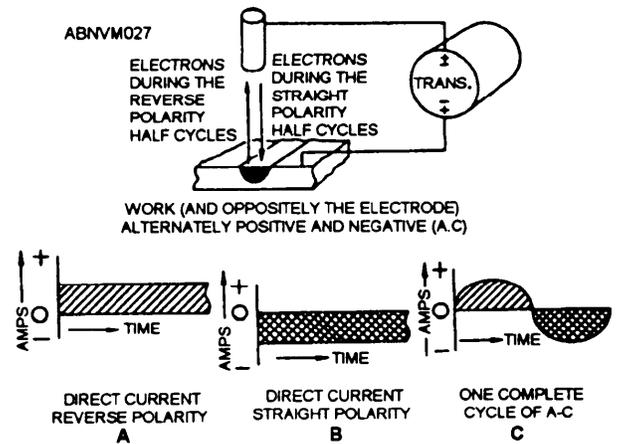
Ac welding as a combination of dc straight and reverse polarity welding.
